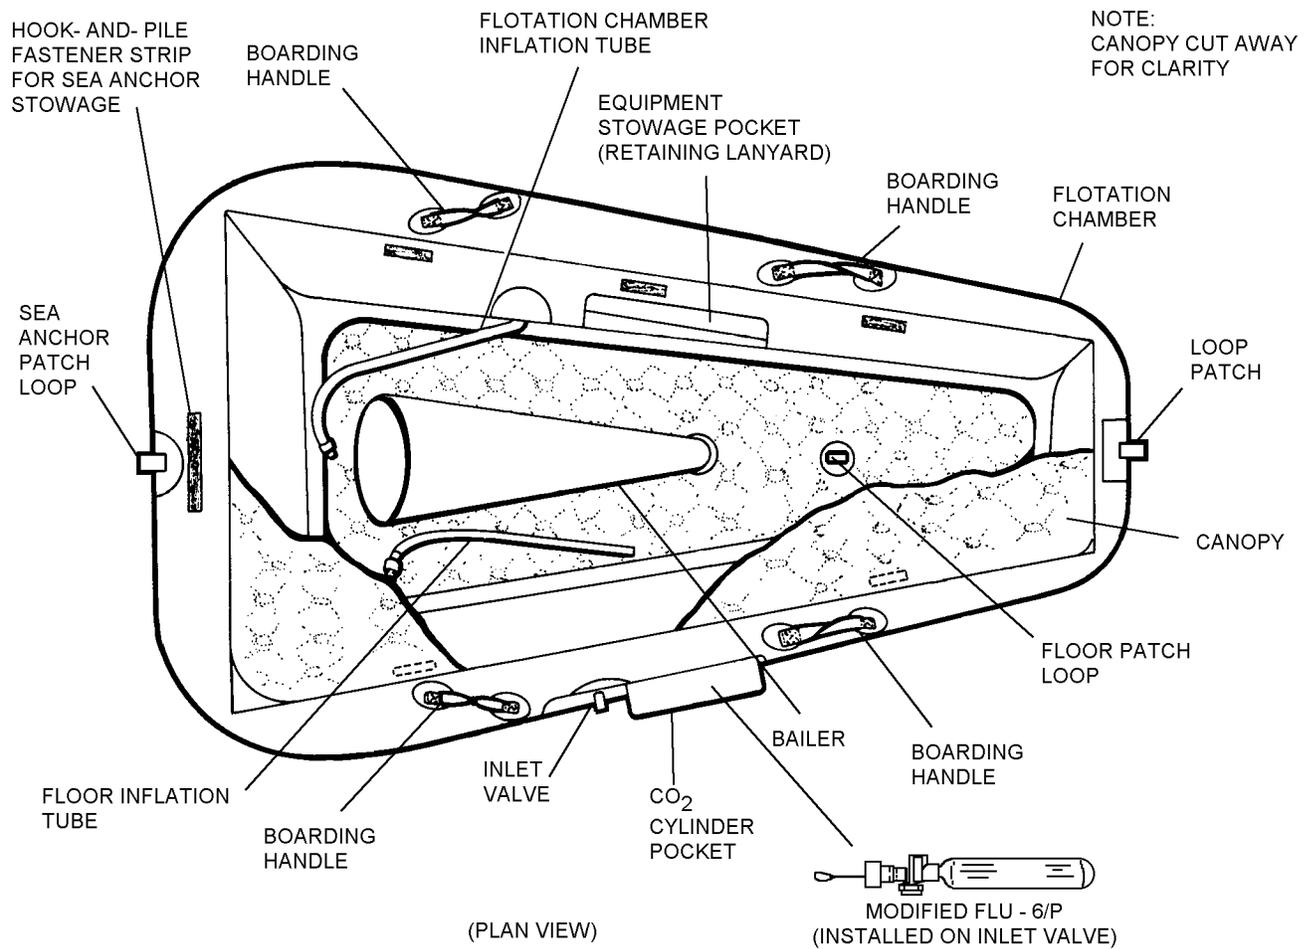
LRU-23/P Liferaft Assembly Components and Parts (Sheet 1 of 2)
